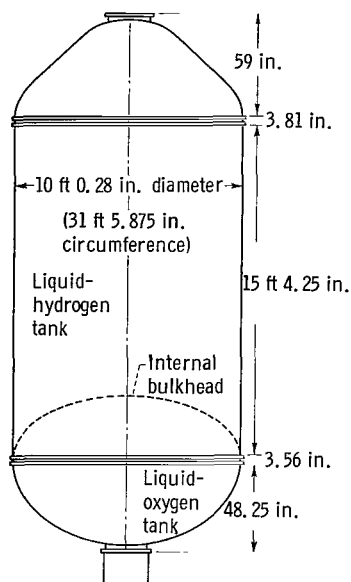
Outline dimensions of full-scale Centaur tank used for installation of insulation system.
